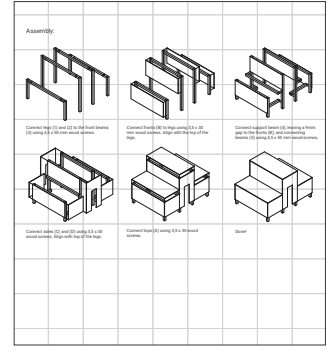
Staircase structure. Drawing of parts and assembly scheme.
